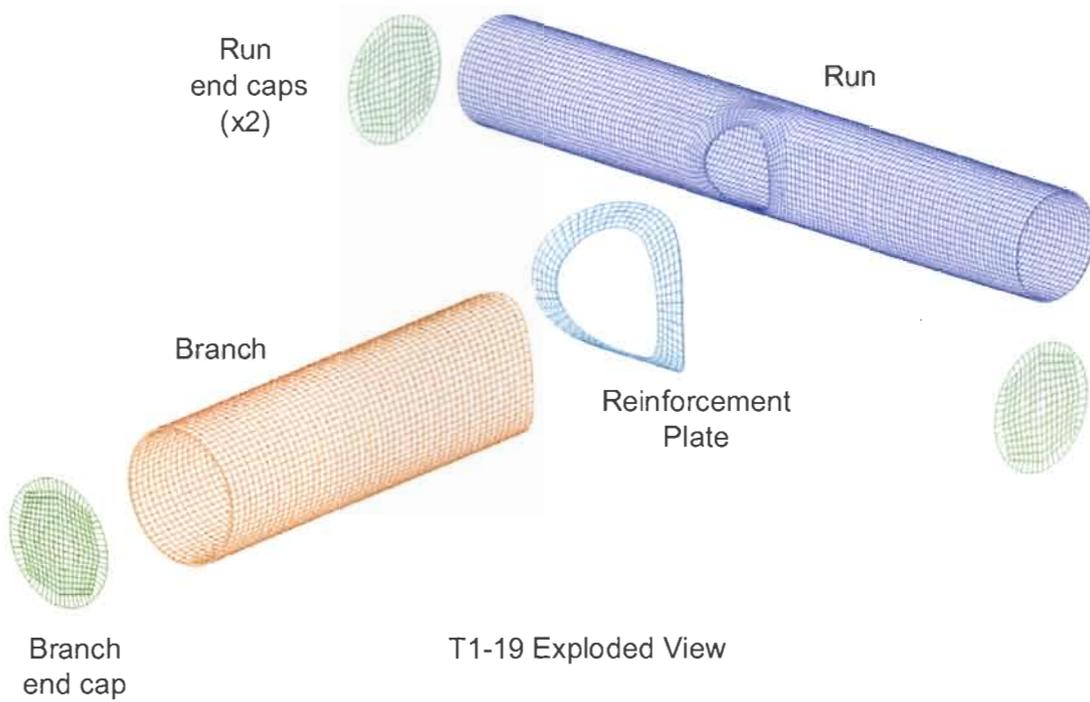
Exploded view of T1-19 is shown, identifying the components.
